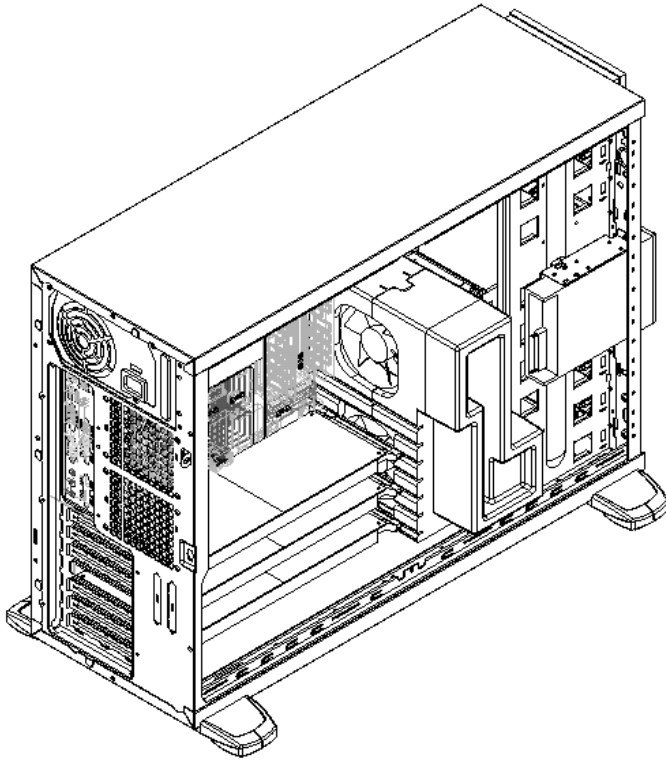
Rear Isometric View, Open Access Cover and Bezels Removed
